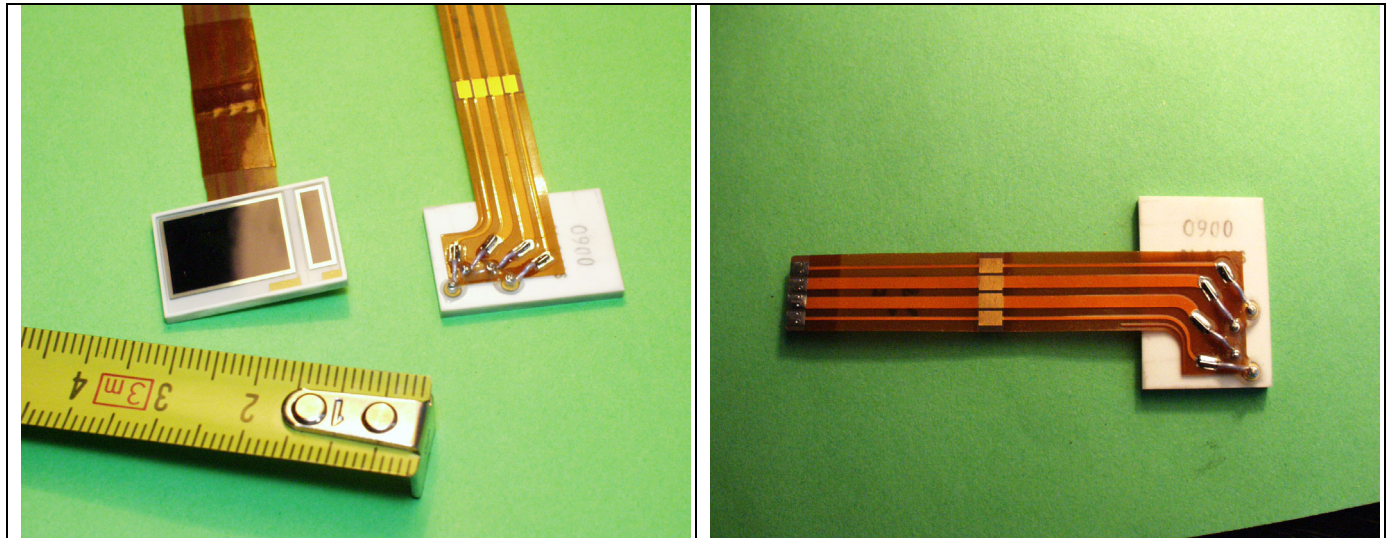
Picture of the kapton flex welded on a DPD
